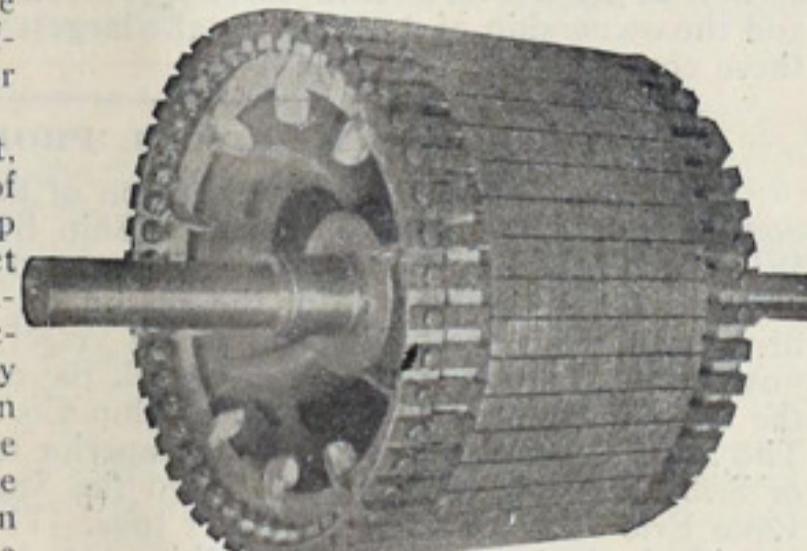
WESTINGHOUSE TYPE C MOTOR, SECONDARY ELEMENT.
